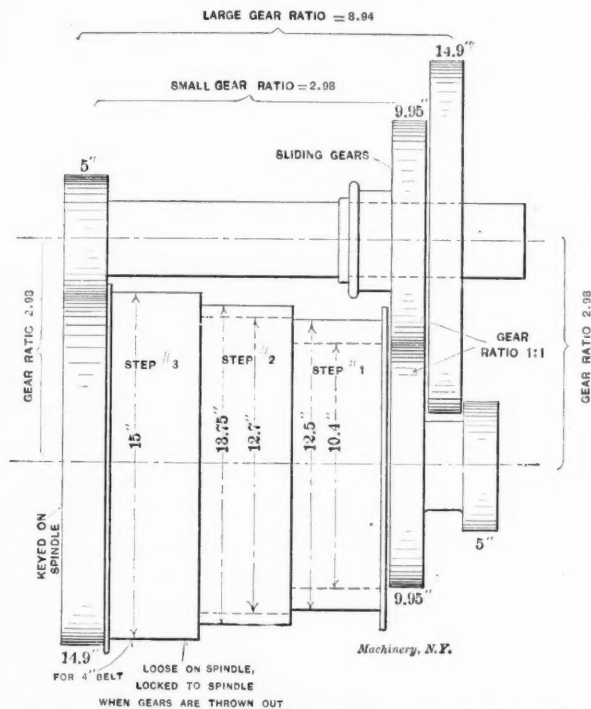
Two Methods of Laying Out the Cone for a Double Back-gearing Spindle.
